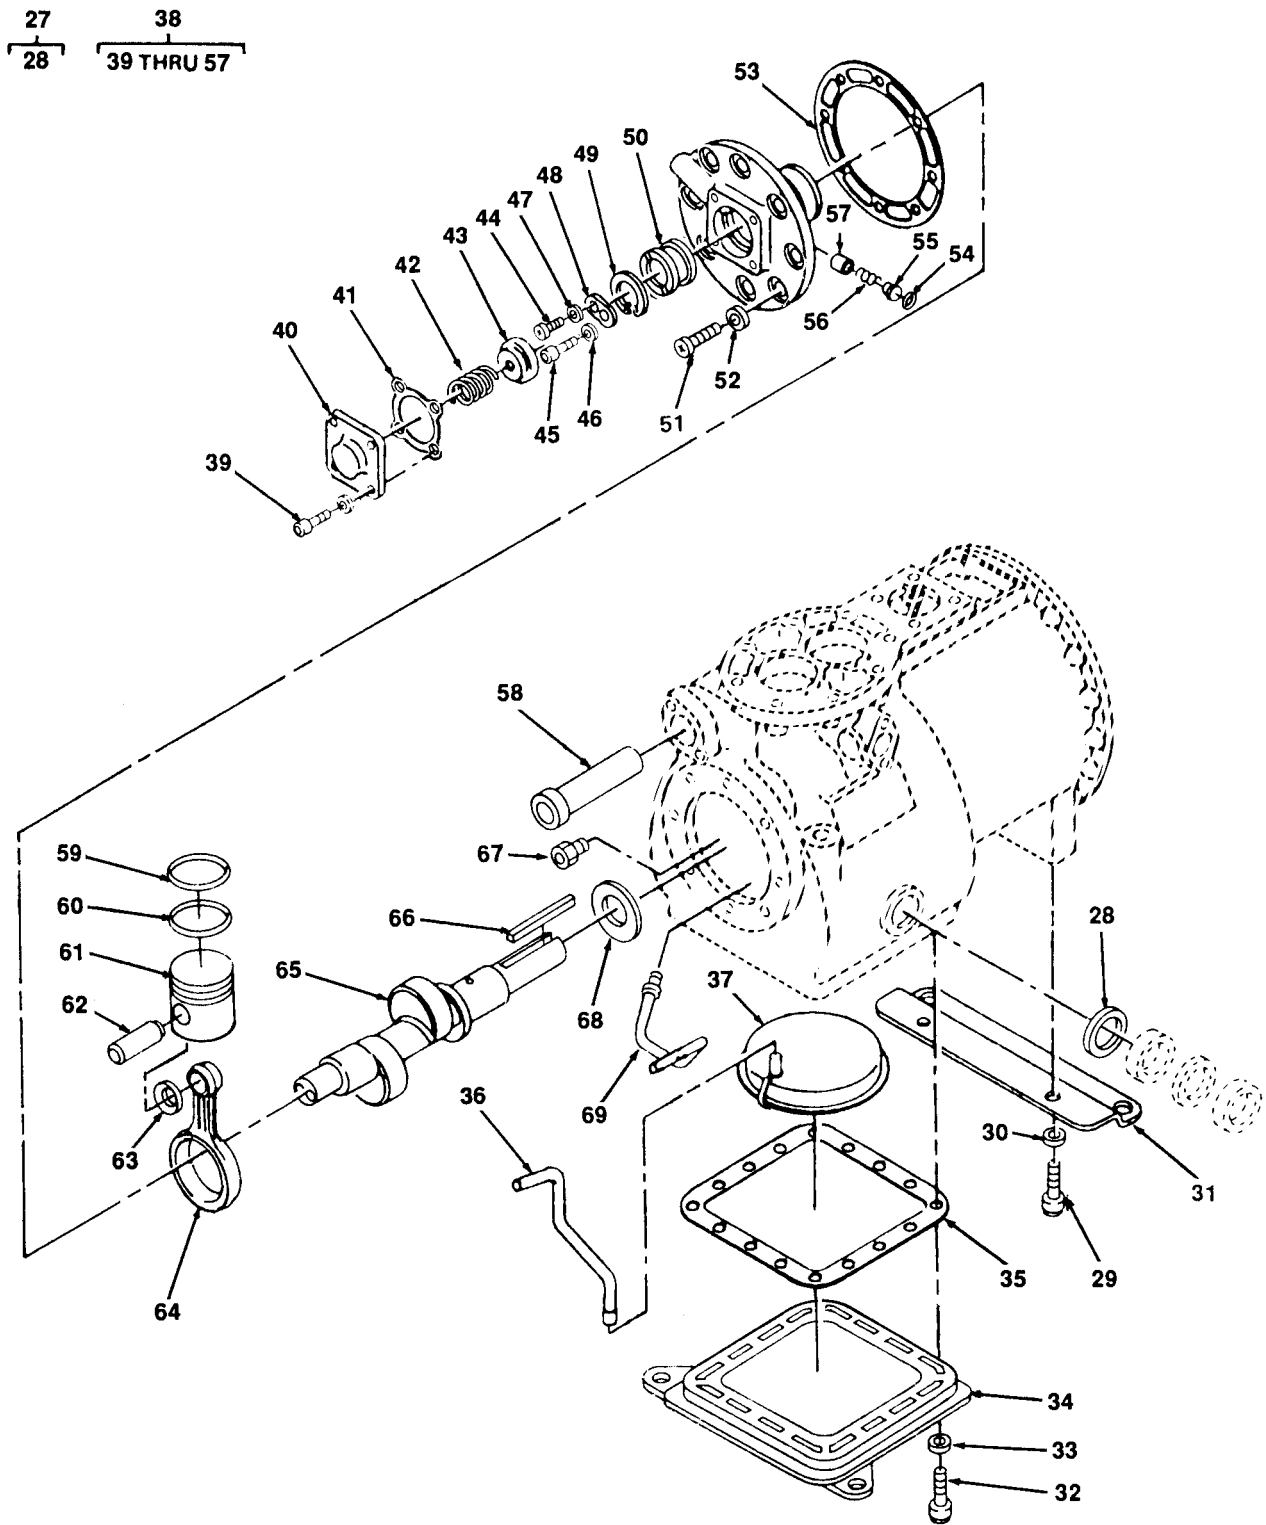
Motor and Compressor Assembly (Sheet 2 of 2).
